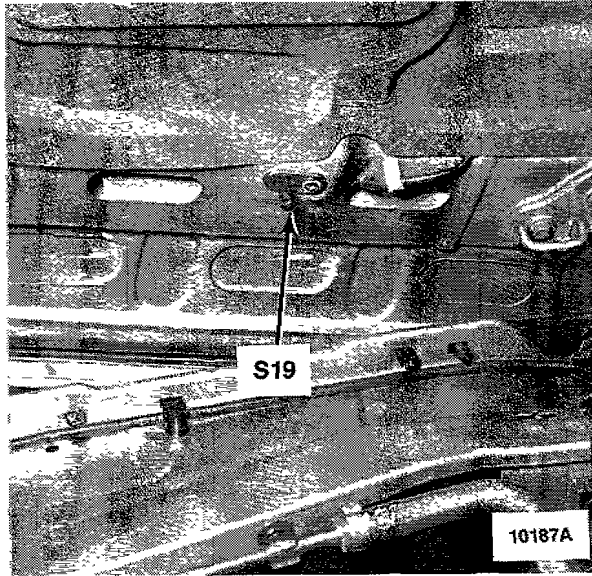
LH Front Of Engine Compartment (Air Filter Removed) (750iL Shown; 740i/L Similar)
